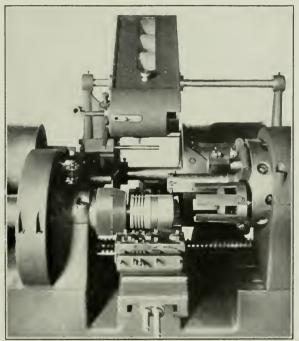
Machining a Piston in a Cleveland Magazine Machine
